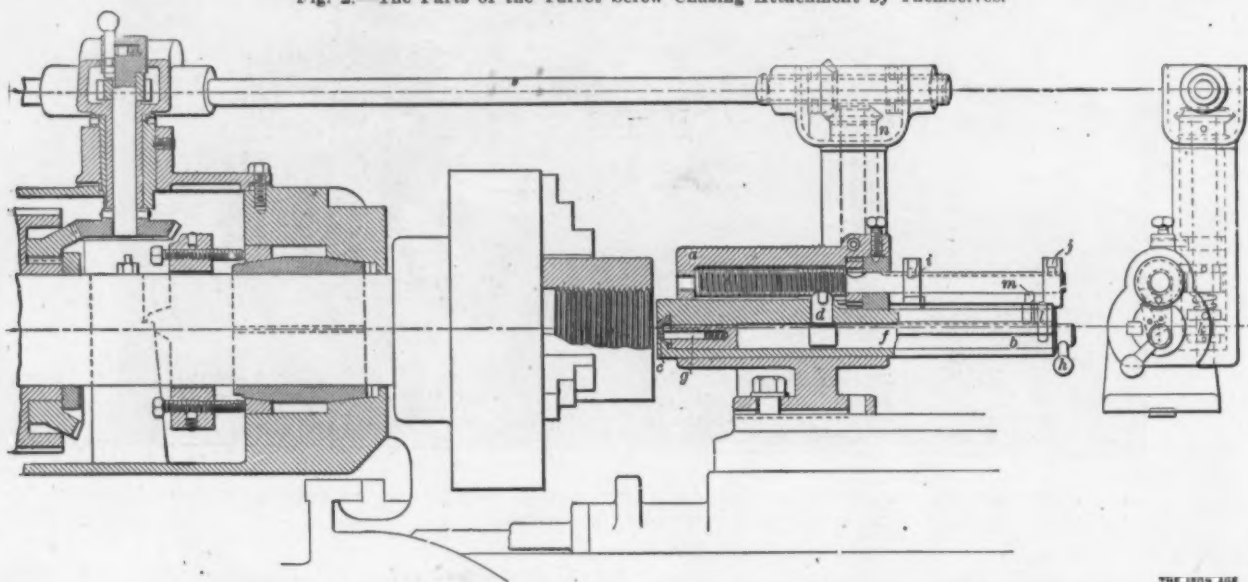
Sectional Elevation, Showing the Drive and Construction of the Turret Screw Chasing Tool.
